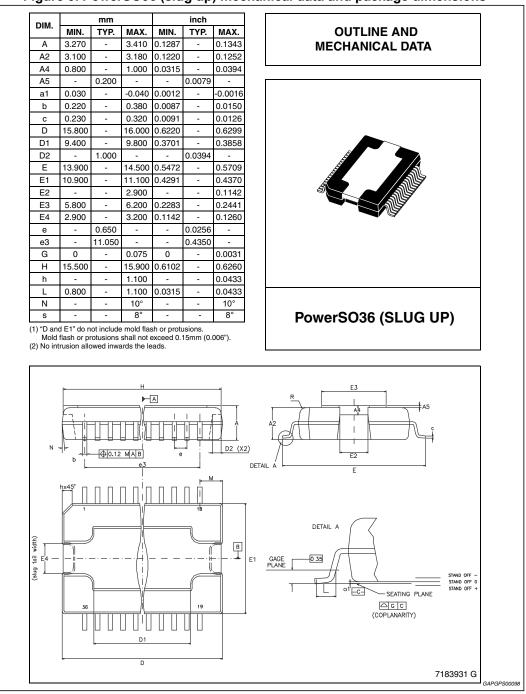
PowerSO36 (slug up) mechanical data and package dimensions
